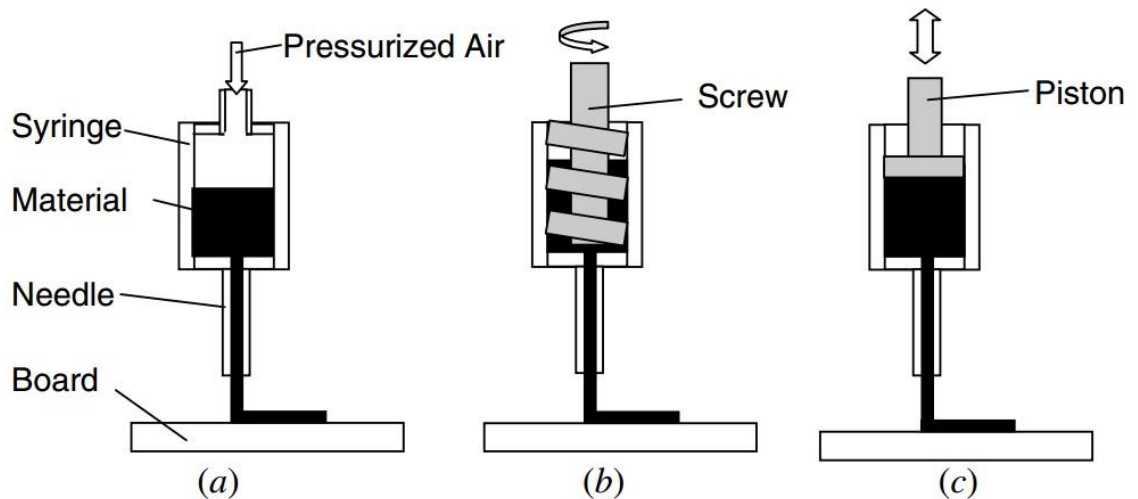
extrusion based printing with different mechanisms. (a) Extruded filaments via pressurised air, (b) rotary system and (c) mechanical piston.
